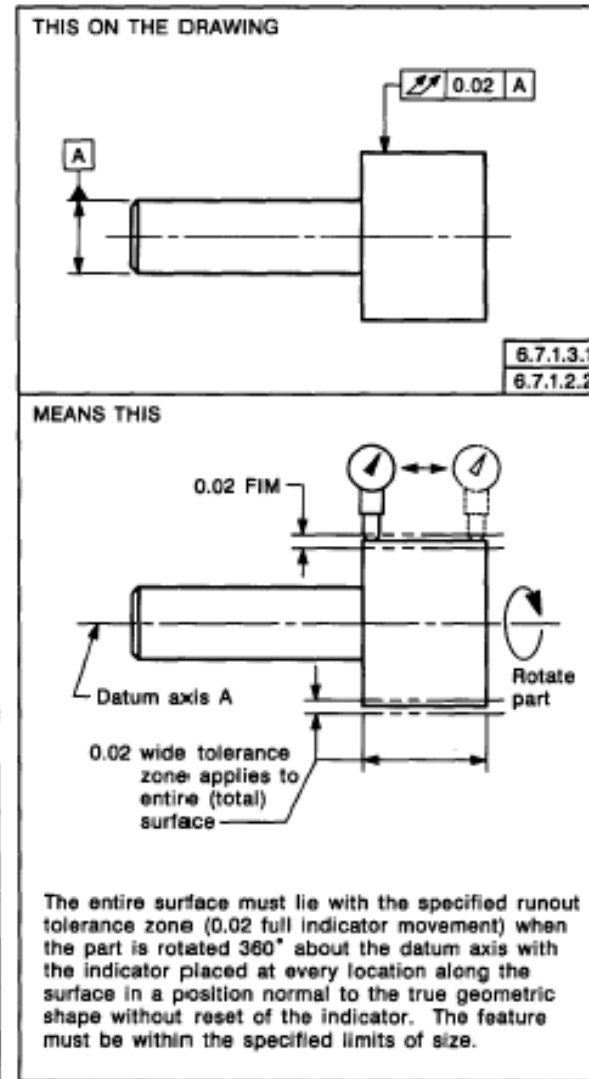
SPECIFYING TOTAL RUNOUT RELATIVE TO A DATUM DIAMETER
